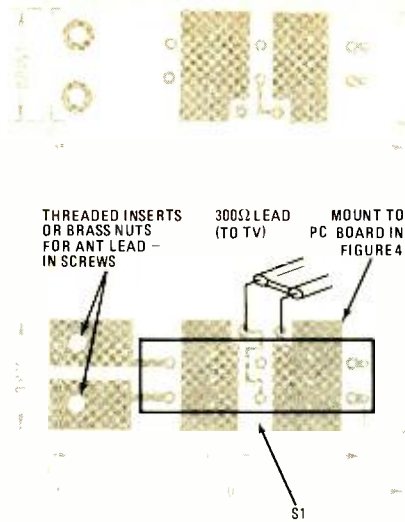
COMPONENT PLACEMENT diagram of switch PC board.
